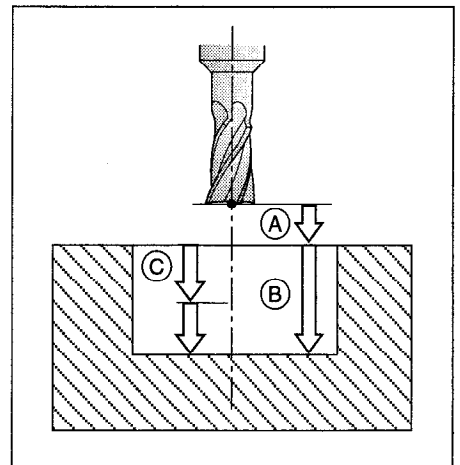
Distances and infeeds for CIRCULAR POCKET MILLING
